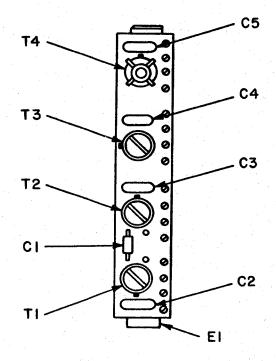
28 MHz Subassembly A2A4A18, Component Locations
